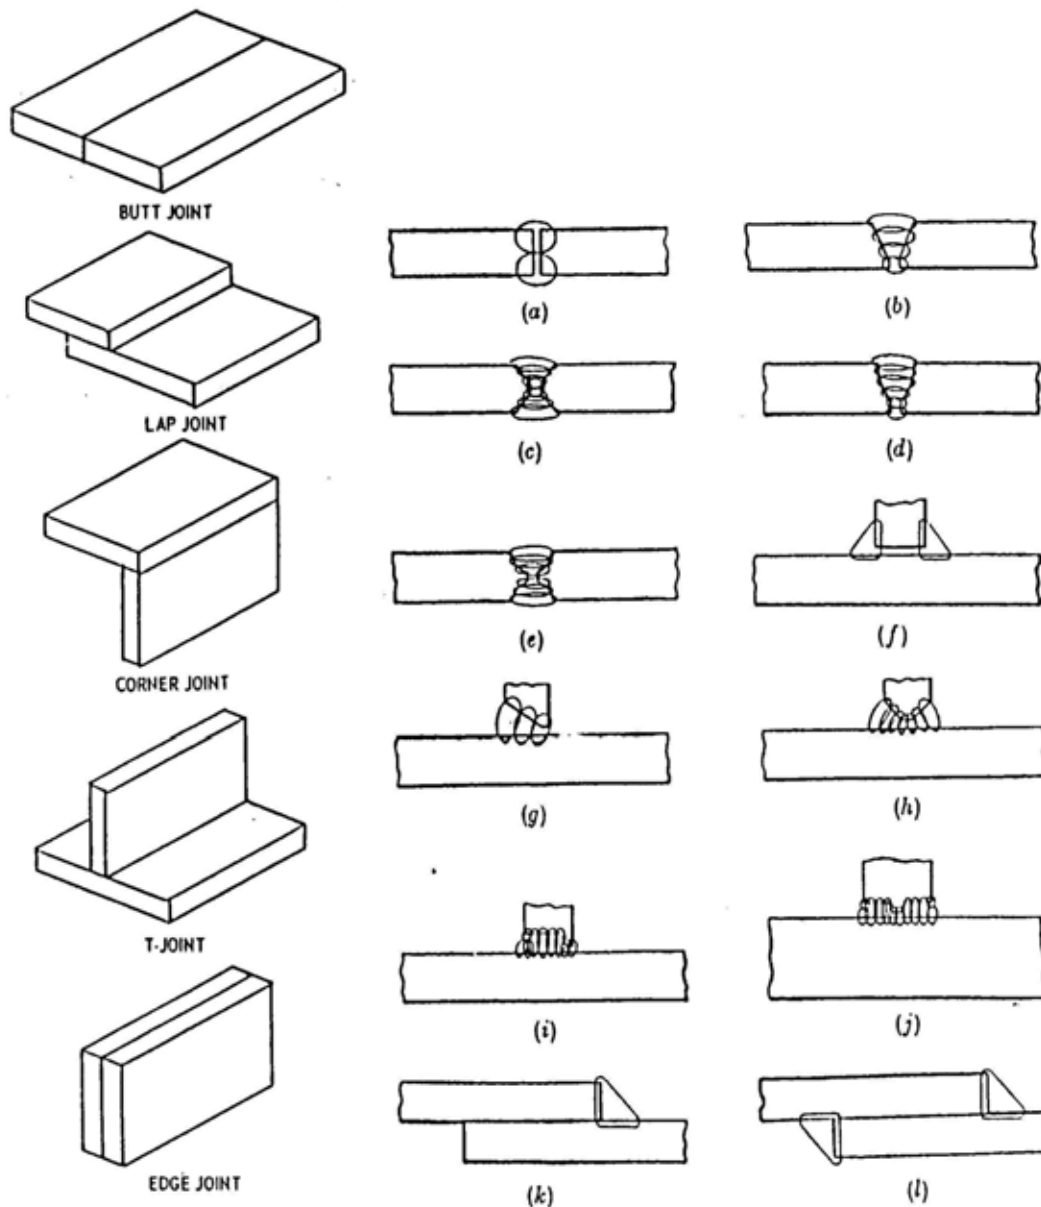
Types of welding joints: (a) square butt , (b) single-v butt , (c) double-v butt , (d) single-u butt , (e) double-u butt , (f) square-t , (g) single-bevel t , (h) double-bevel t , (i) single-u t , (j) double-u t , (k) single-bead lap , (l) double-bead lap.
